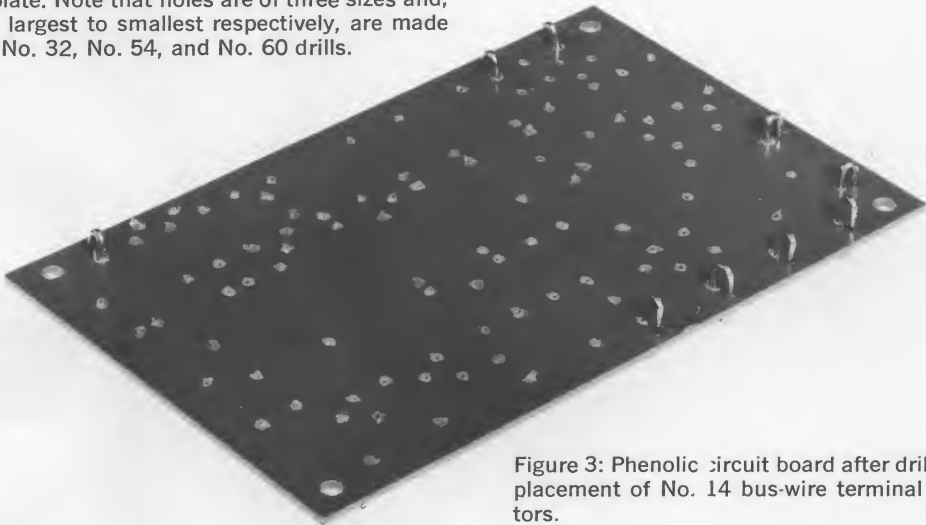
Phenolic circuit board after drilling and placement of No. 14 bus-wire terminal connectors.
